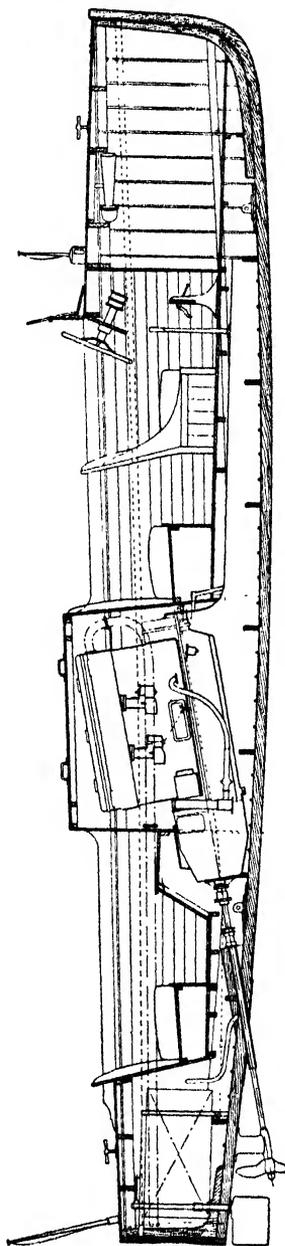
24-ft. Brooke Runabout; general lay-out
